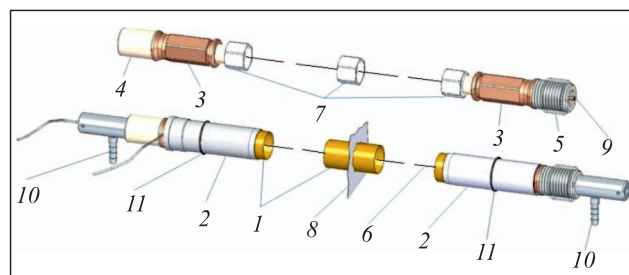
Completely assembled drift tube with end plugs: 1 — drift tube; 2 — sleeves; 3 — hexagonal bushes; 4 — insulating inserts; 5 — nut; 6 — anode wire; 7 — hexagonal spacers; 8 — film strip support; 9 — copper pin; 10 — gas connectors; 11 — O-rings
